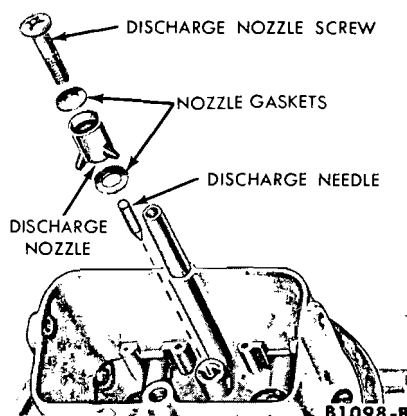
Accelerating Pump Discharge Assembly—Holley 4-V
